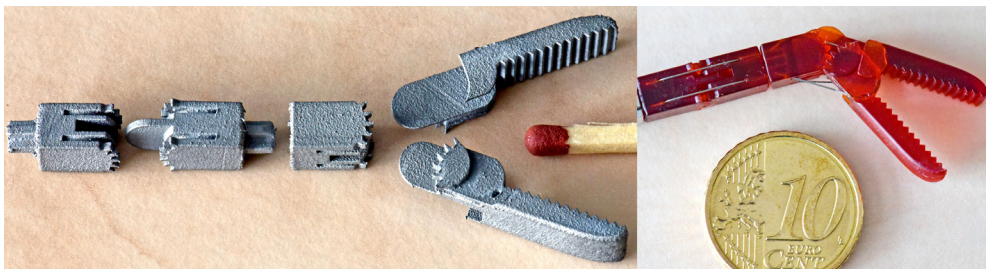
Example of the rough surface of parts printed with metal AM(left). The parts are meant to be used in a steerable, medical instrument, however they require extensive polishing before they can be used in a functional mechanism (match for scale). As comparison, on the right the same parts 3D printed using a polymer-based AM process.
